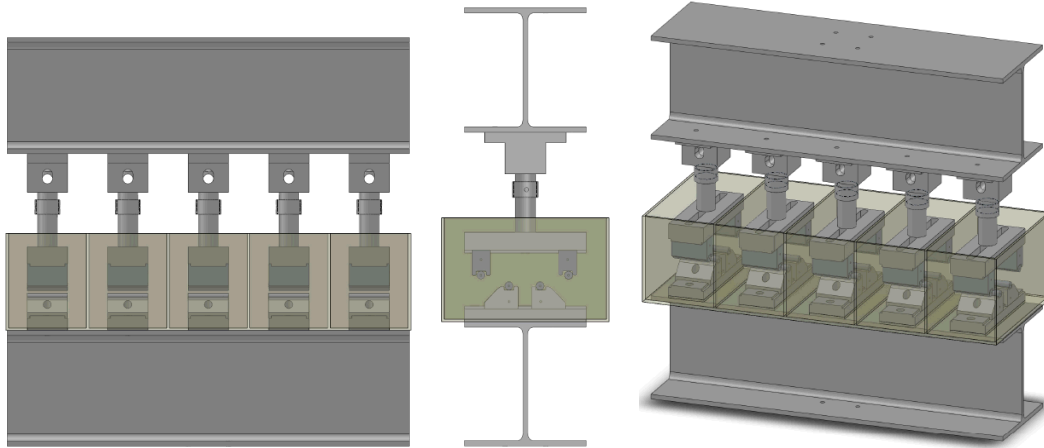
Front, side, and axonometric projections of the multi-specimen bending fixture assembly.
